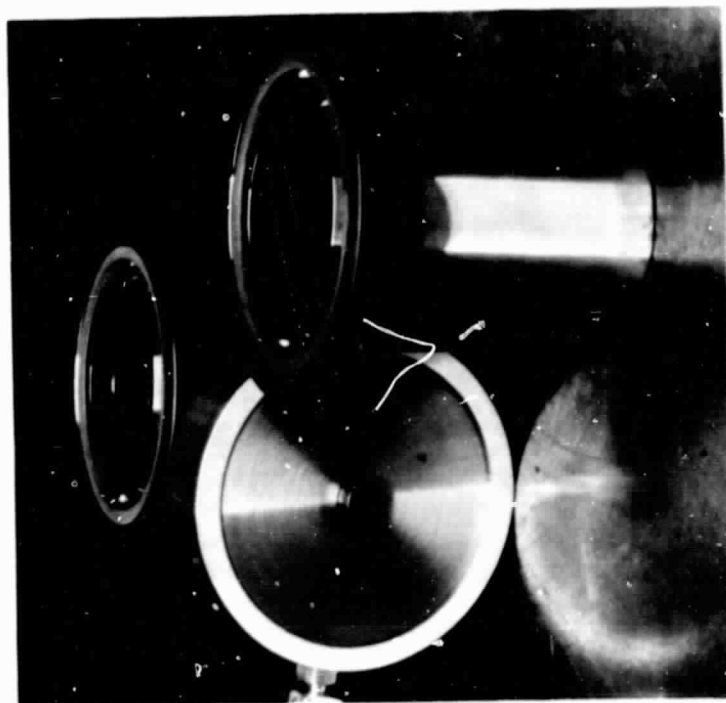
BEARING MOUNTING PEDESTALS AND
